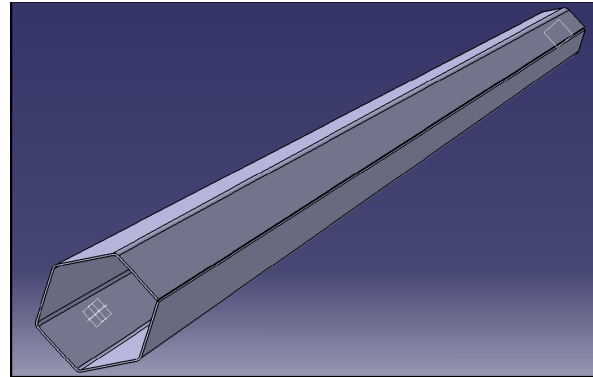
The formed pipe geometry with the edge along which welding is performed
